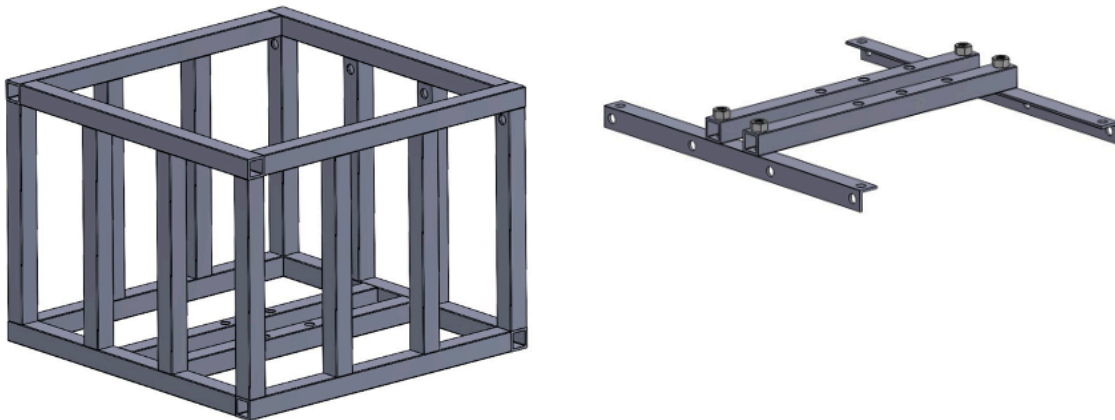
Main welded frame of chassis (left) and removable top portion of chassis (right).
